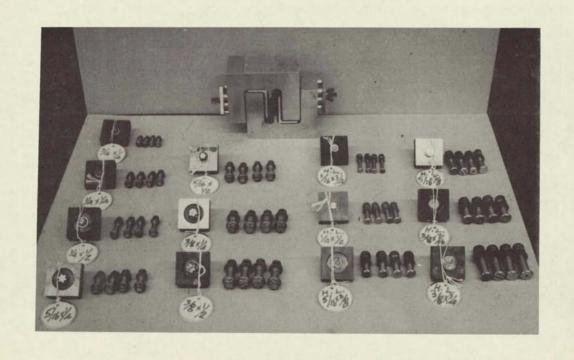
FASTENERS FOR SINGLE SHEAR TESTS AND SINGLE SHEAR FIXTURE
